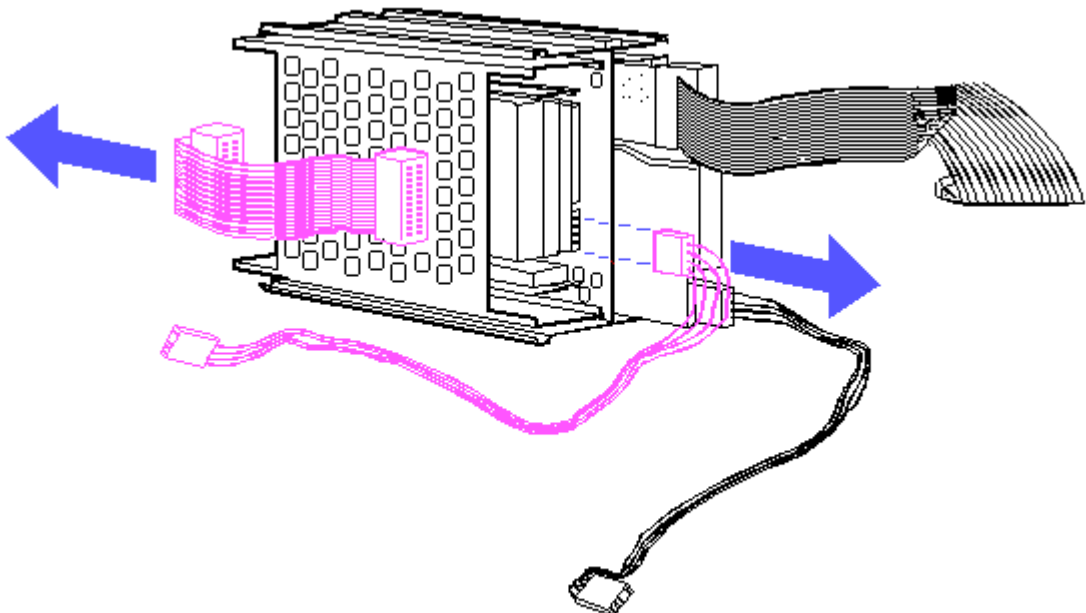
Disconnecting the Fixed Disk Drive Cables
